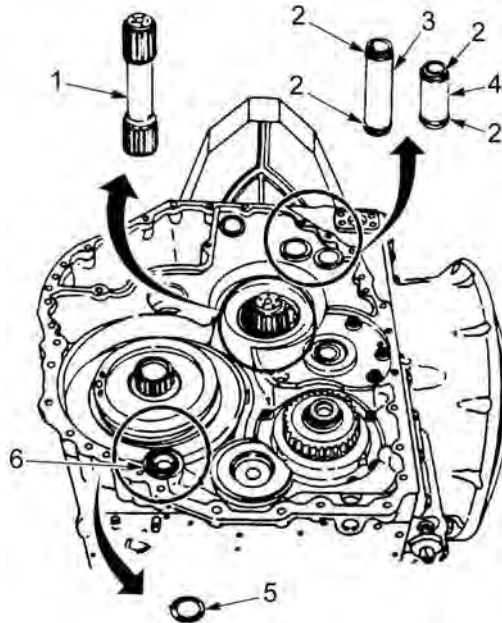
Bevel Gear Driven Shaft, Filter Tubes, and Packings Removal.
